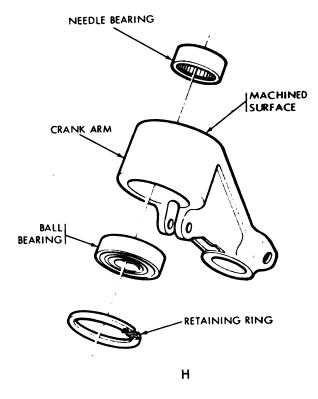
Manual traversing drive disassembly or assembly (1 of 4).
